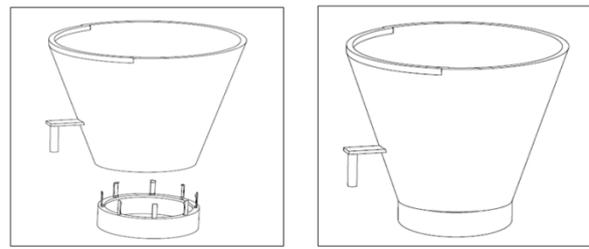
Combine filter cover with filter casing (a) old design (b) new design
